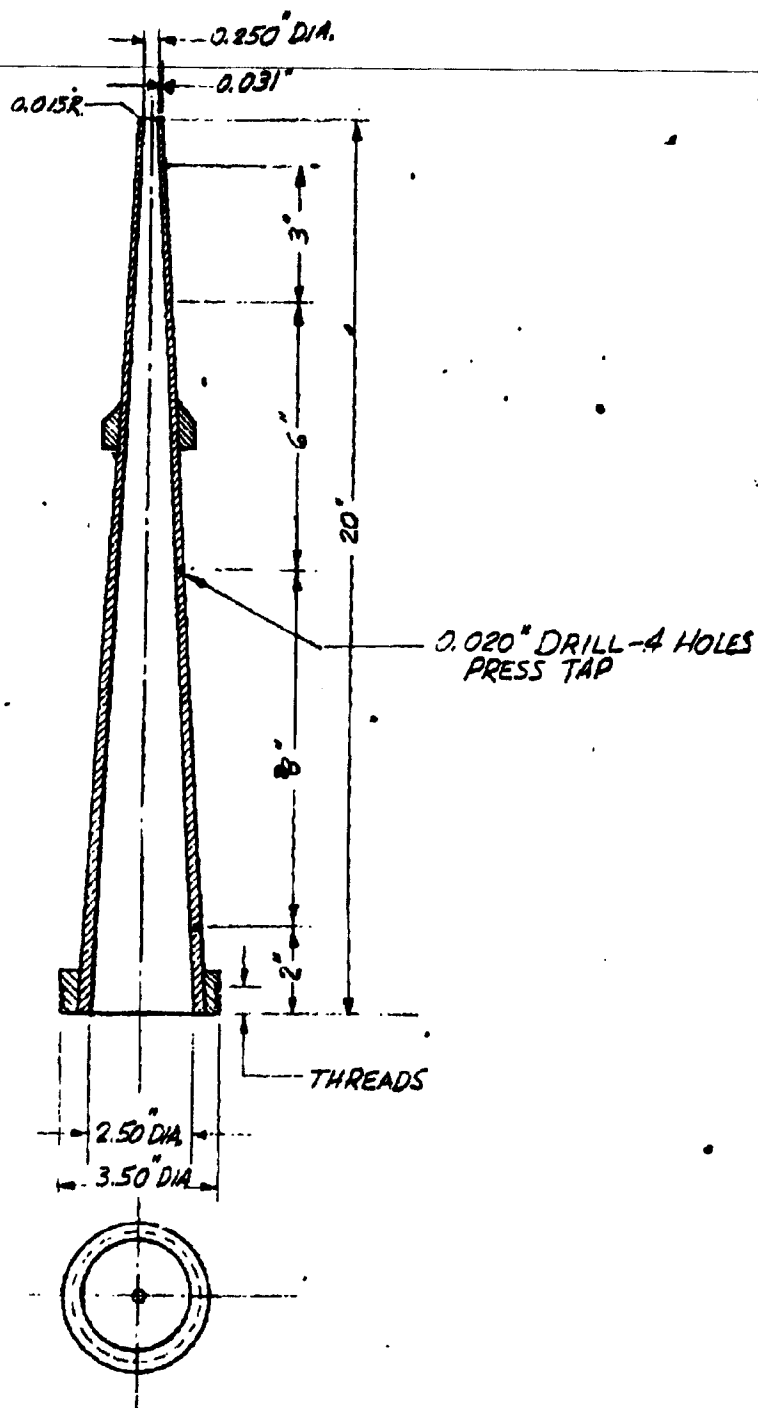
SECTIONAL VIEW OF SAMPLING PROBE
